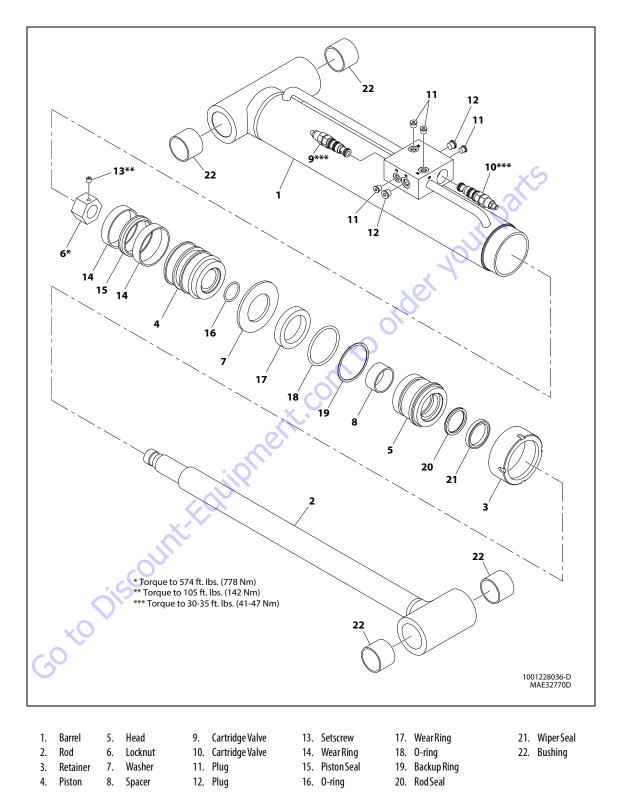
Mid Lift Cylinder - USA Built Machine
